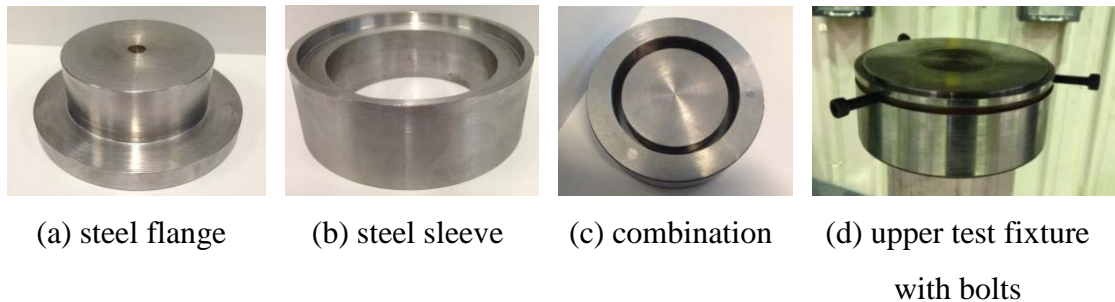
Details of test fixture (Wang et al. 2015b)
